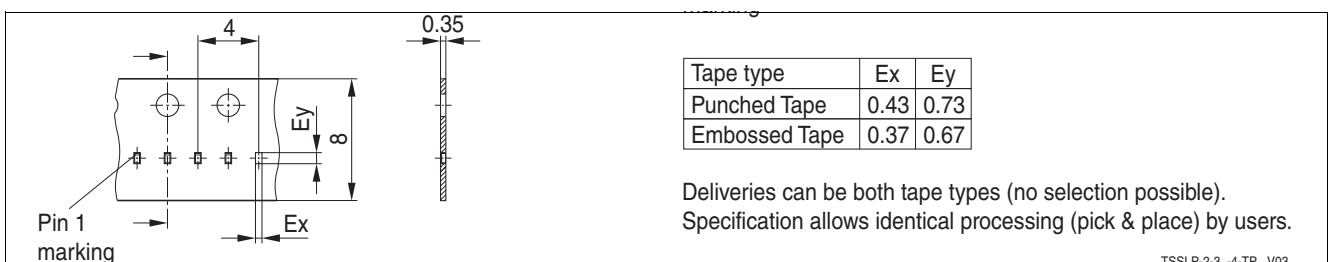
TSSLP-2-4 Packing (dimension in mm)
